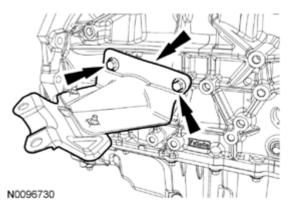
Locating Exhaust Flexible Pipe Bracket With Mounting Bolts Courtesy of FORD MOTOR CO.
